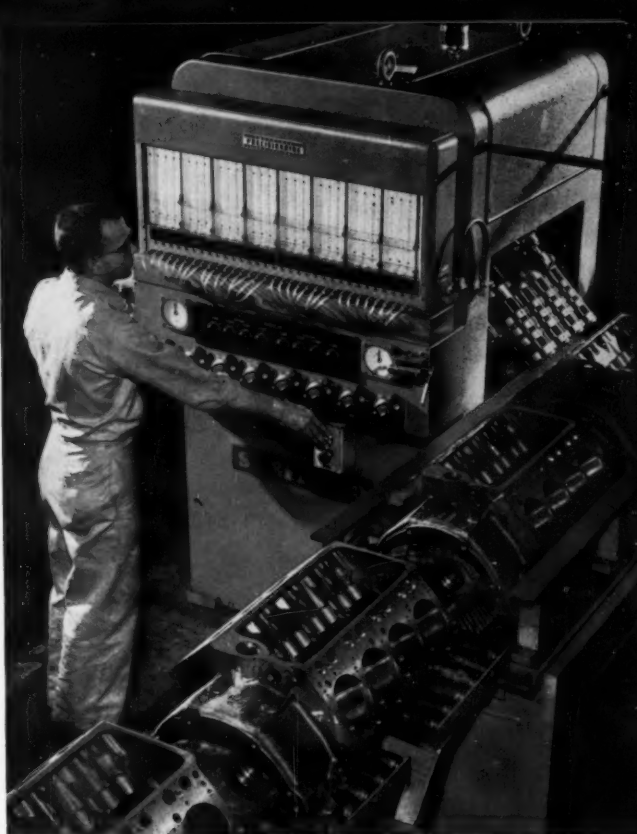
Eight-spindle, vertical machine for rough-honing cylinder bores. Blocks are first turned on one side and then on the other to complete the eight bores.
